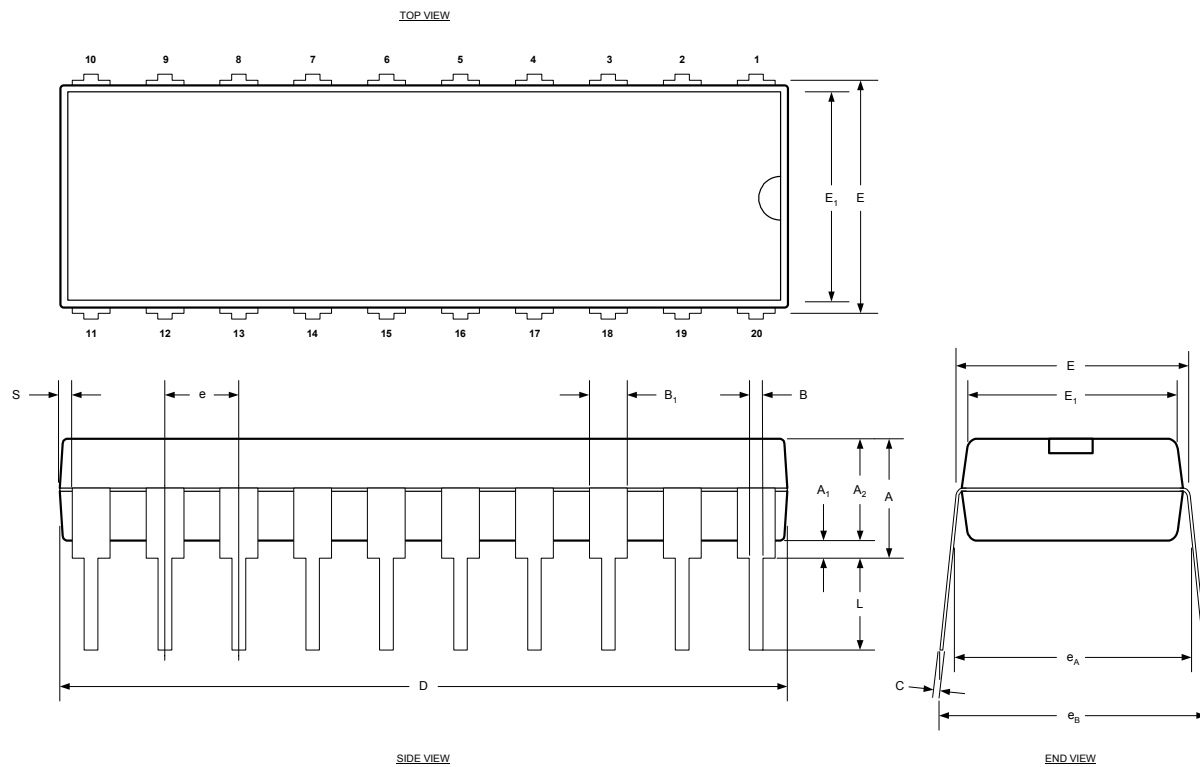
Package Outline Drawing DIL20, 300 MILS
